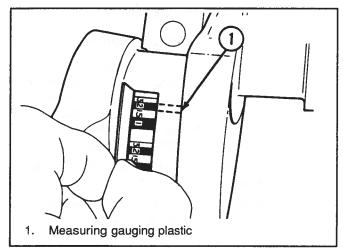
Measuring Bearing Clearance With Plastic Gauging Material
